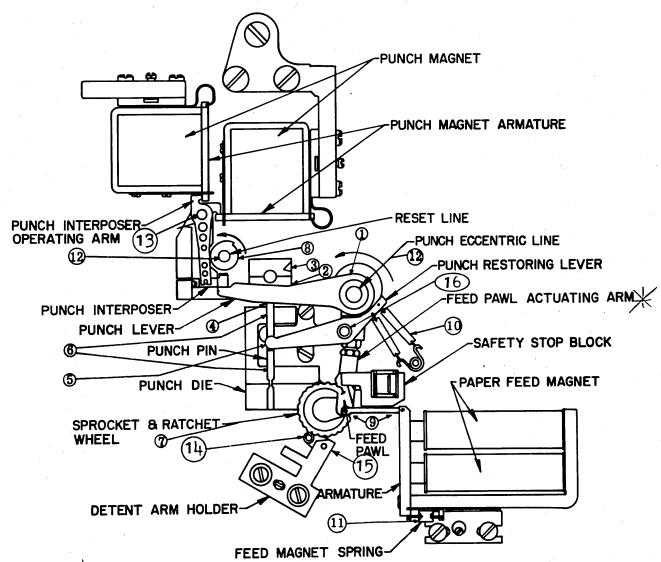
LOCATION OF PUNCH HEAD LUBRICATION POINTS.
